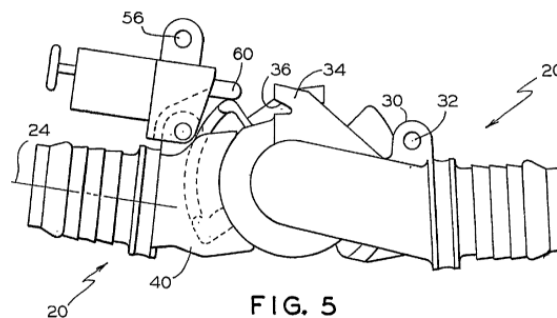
Drawing of a glad hand coupling in patent WO/2006/026173A1.
